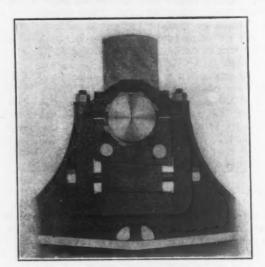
Main Bearing of a Turner-Fricke Gas Engine.
